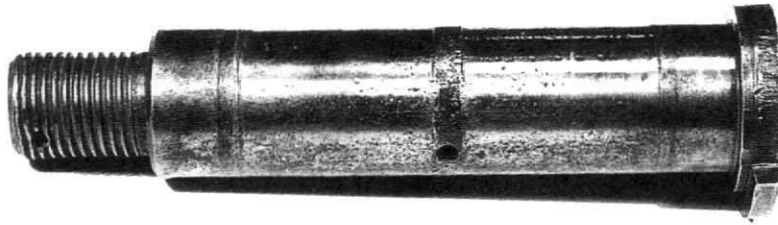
Typical shackle pin that has not been receiving adequate lubrication. Note the worn areas where the bushings were, and the slightly damaged thread where the pin was driven out (with the nut on, please!). The center oil hole was so blocked that it had to be drilled out. Figure 4: End of shackle pin after cleaning and removing the solder that sealed the screw. A well-fitting screwdriver and heat, used together, are needed to remove it.
